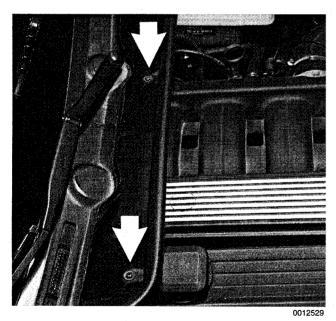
Engine bulkhead wiring harness cover screws (arrows).
